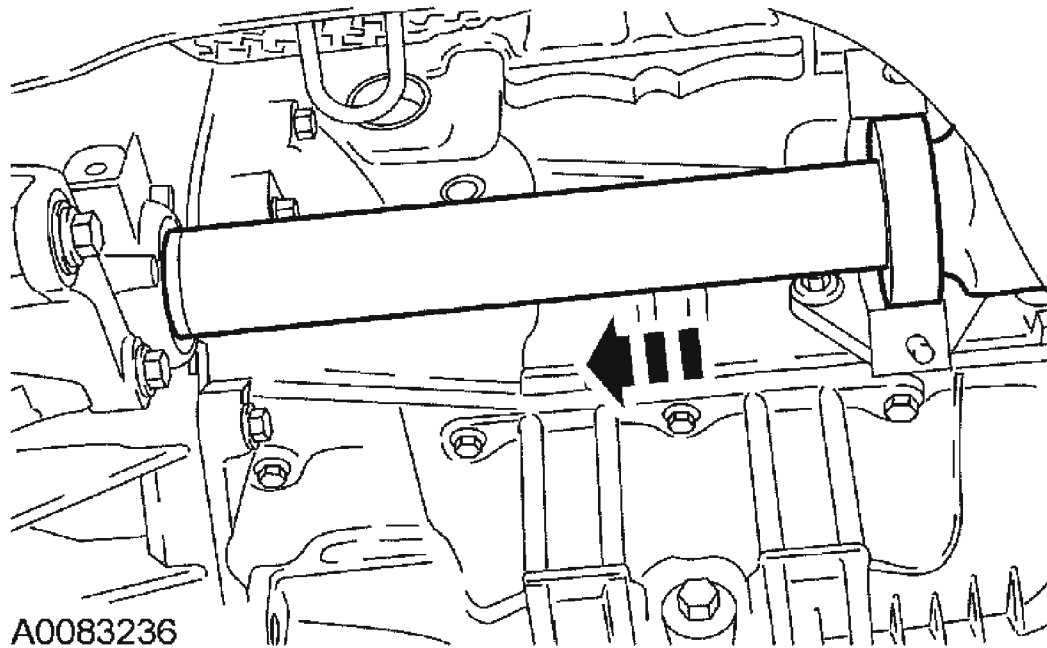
Installing RH Front Halfshaft Together With Intermediate Shaft
